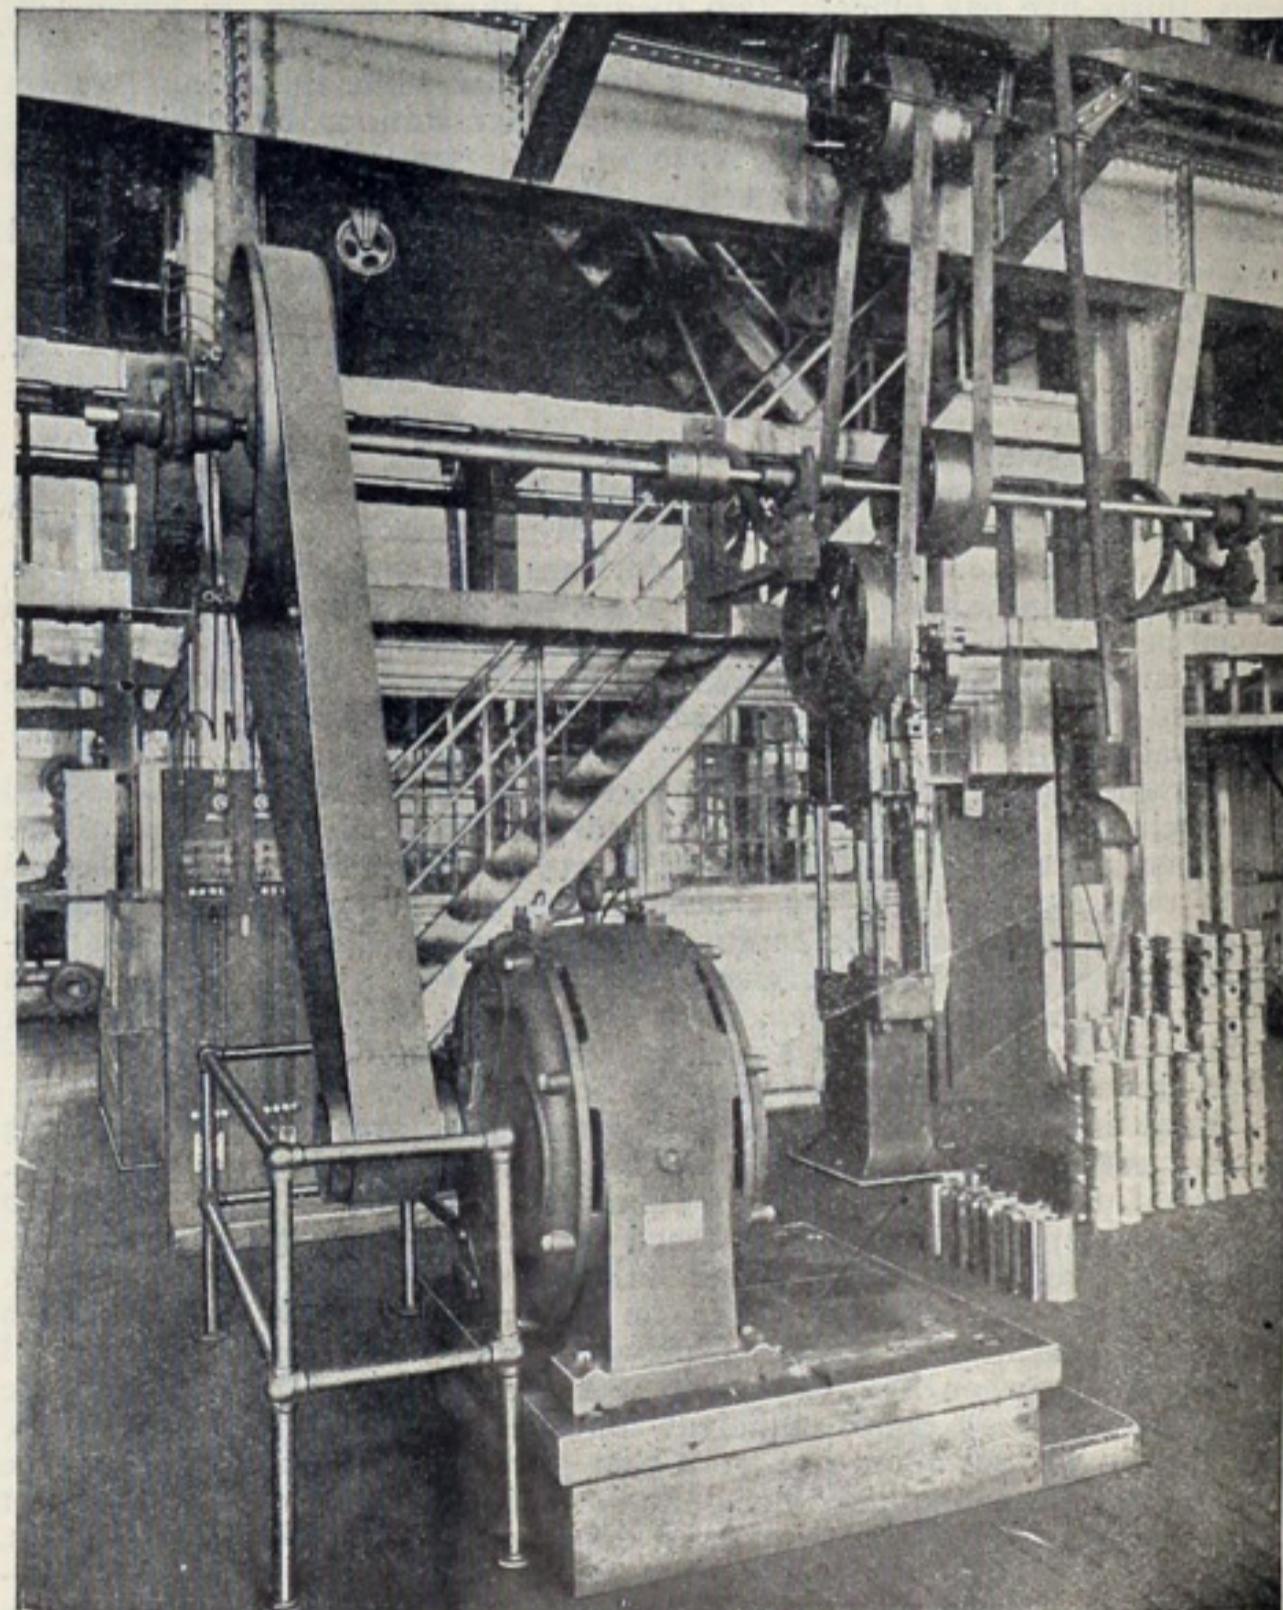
WESTINGHOUSE TYPE C MOTOR DRIVING SHAFT.
